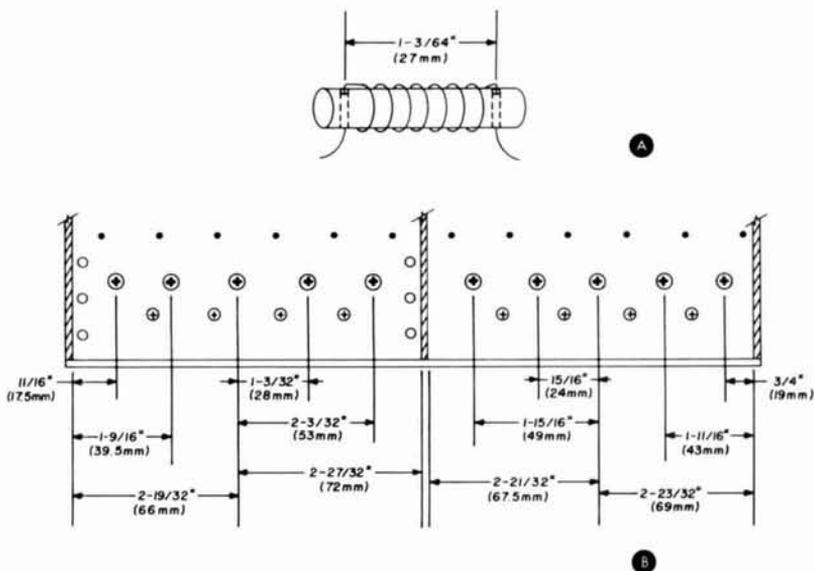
Coil construction details (A) and side view of filter box showing coil spacing (B). Enclosure dimensions are 2-1/8 inches (54mm) deep and 1-7/8 inches (47.6mm) across opening.
